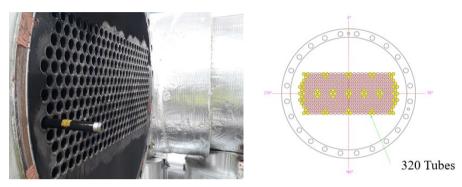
View of the tool used for Eddy-current testing method and a draft locating inspected tubes before operation.
